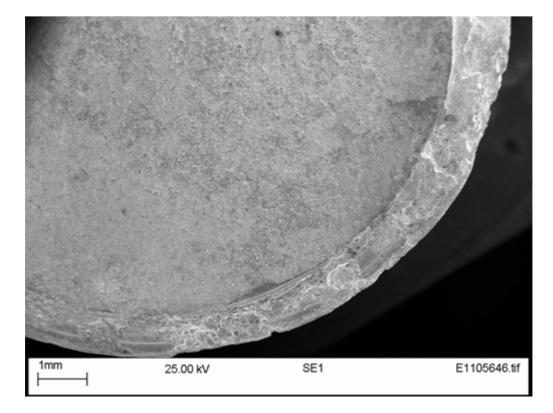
SEM fractograph, showing terminal fracture region of a fatigue cracked bolt.
